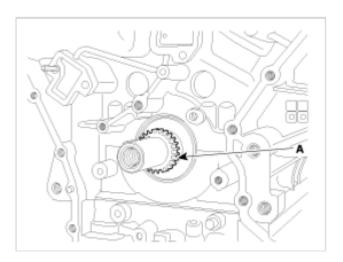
Identifying Crankshaft Sprocket (LH Camshaft Drive)
